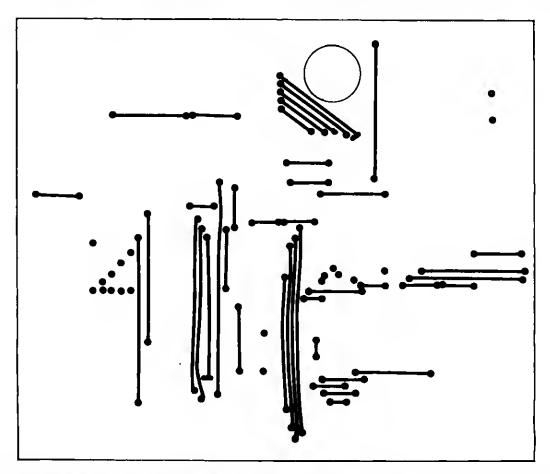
Jumper arrangement for lowercase board, viewed from above. Jumpers should be soldered in place before the integrated circults are mounted. Note that this figure will produce a double-sided PC board.
